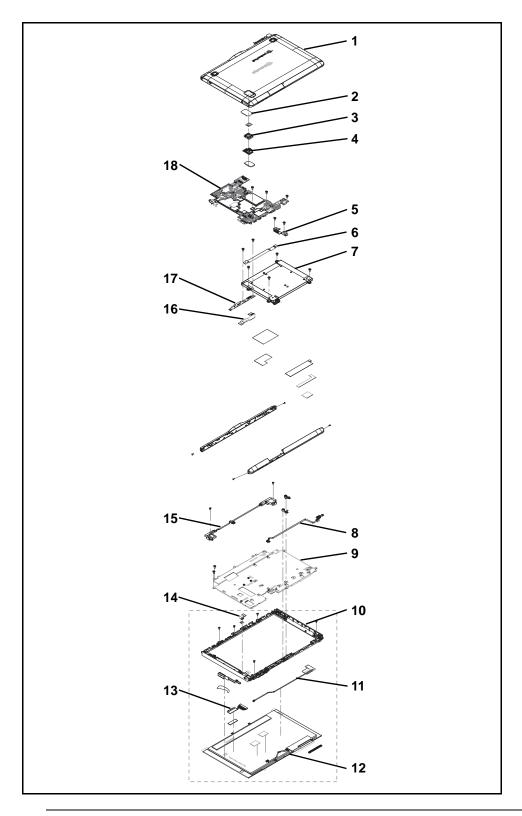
Main Assembly W/O 3G Exploded Diagram
